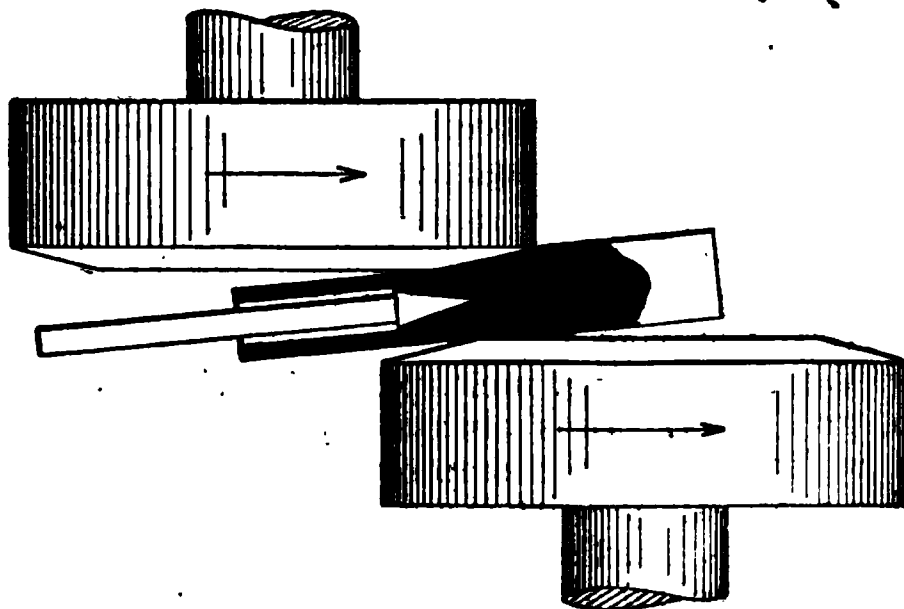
The Stiefel process for rolling weldless steel tubes.
